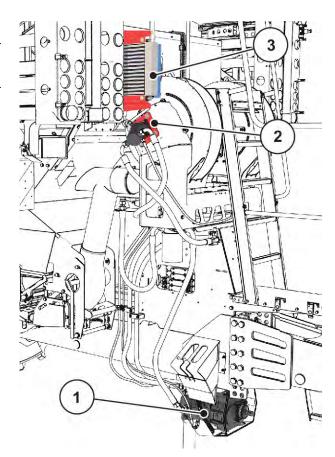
Checking the axial piston pump, axial piston motor, and oil cooler
